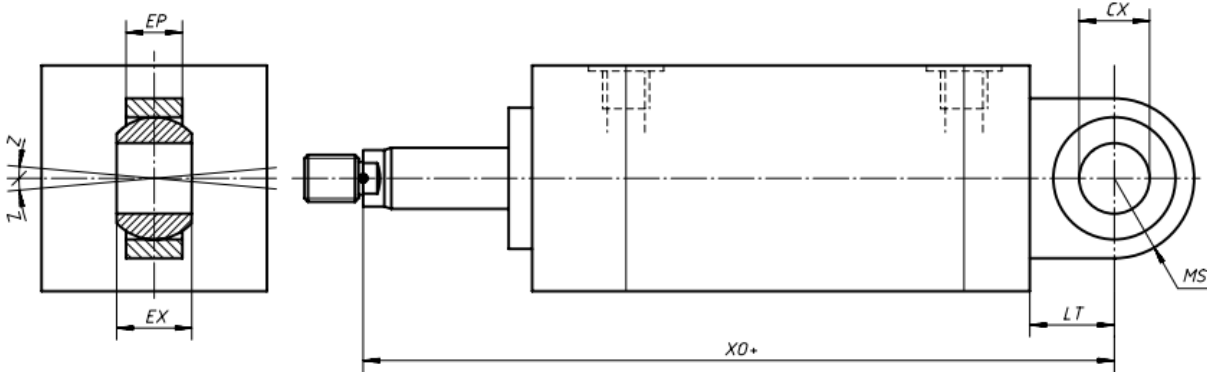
MP5 — Cap, fixed eye with spherical plain bearing
